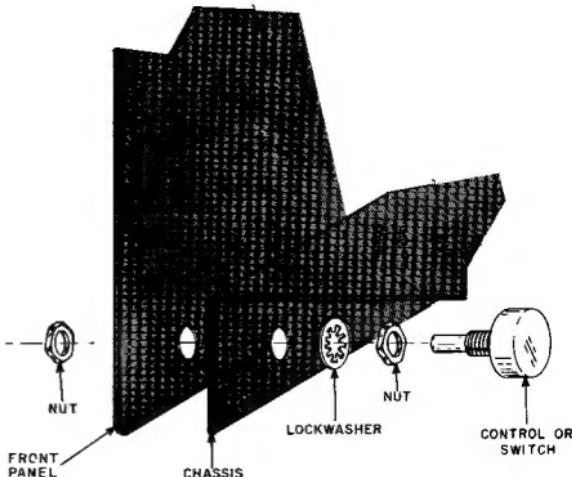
HOW TO MOUNT THE FRONT PANEL WITH A CONTROL
